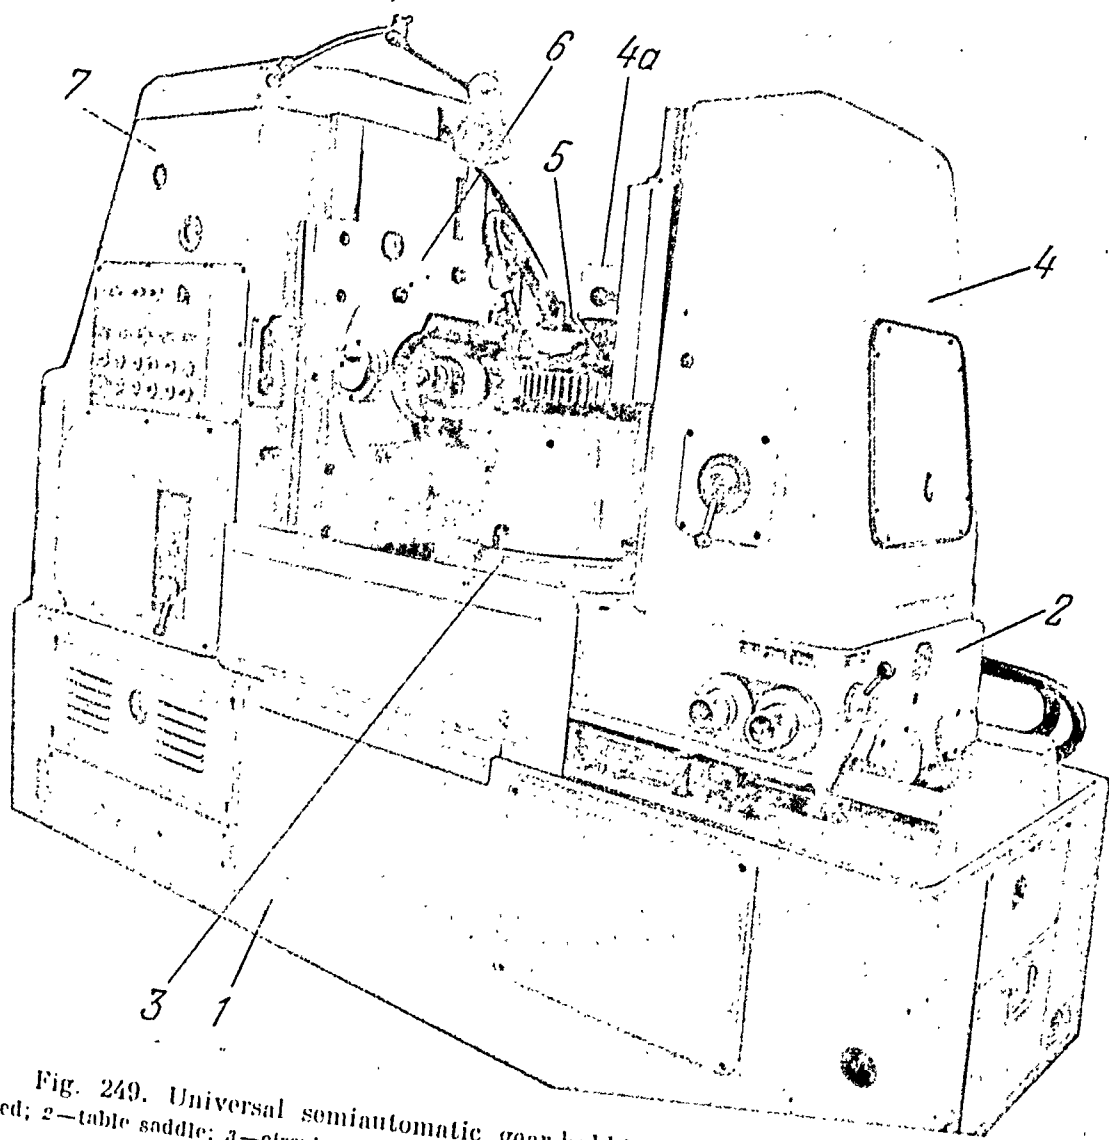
Universal semiautomatic gear-hobbing machine, model 5K32H:
